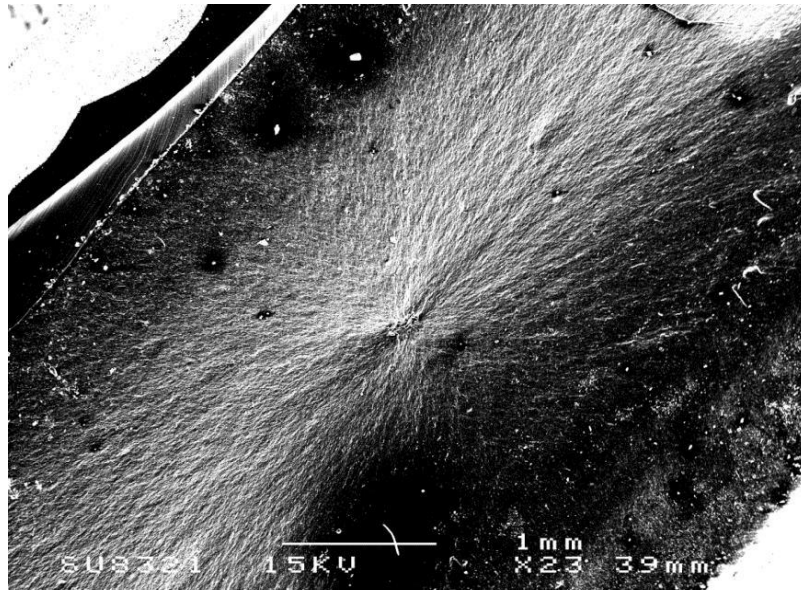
A fracture surface of a spring seal displaying multiple small cracks initiating from an inherent flaw.
